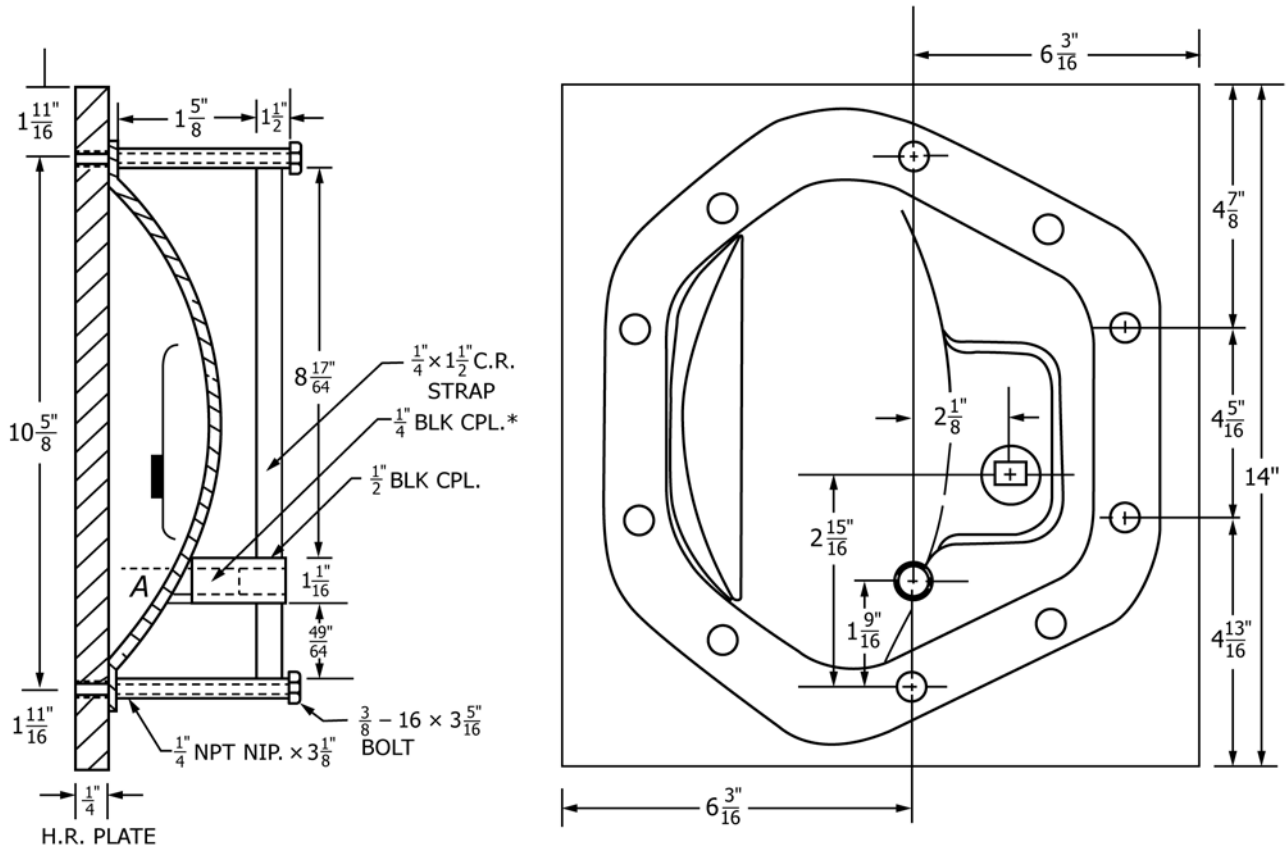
Example of Rigid Axle Mount on Test Stand
